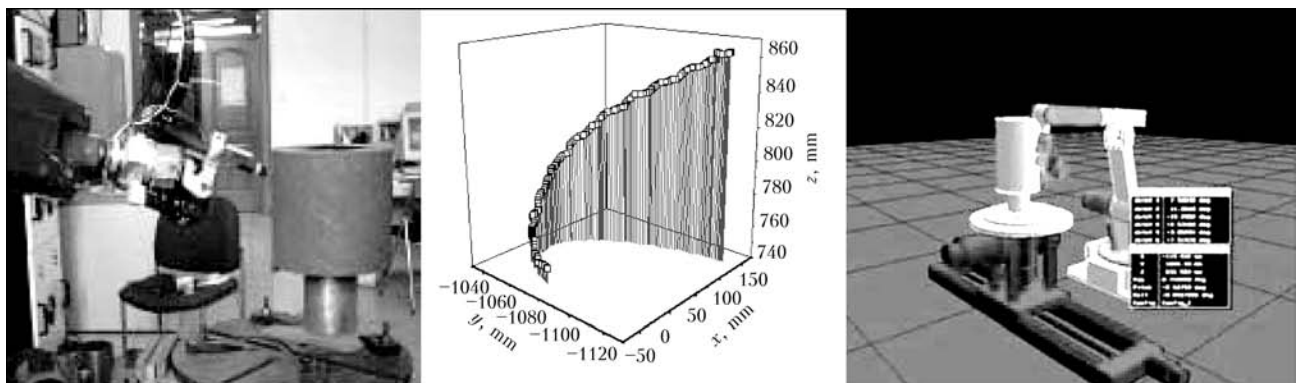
Teleteaching helical-line welding assisted by LSVS
